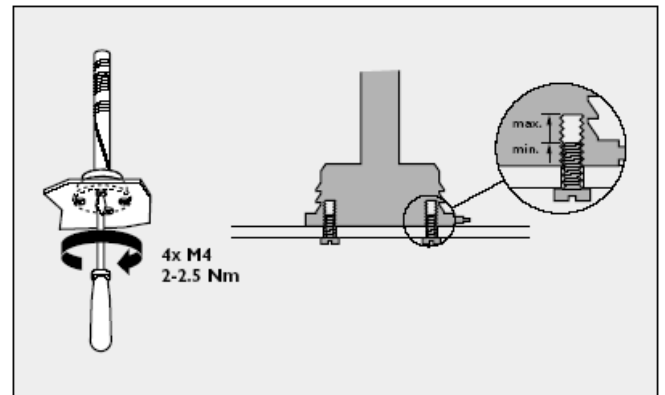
Fixation of power coupler to the heat sink with 4 bolts
